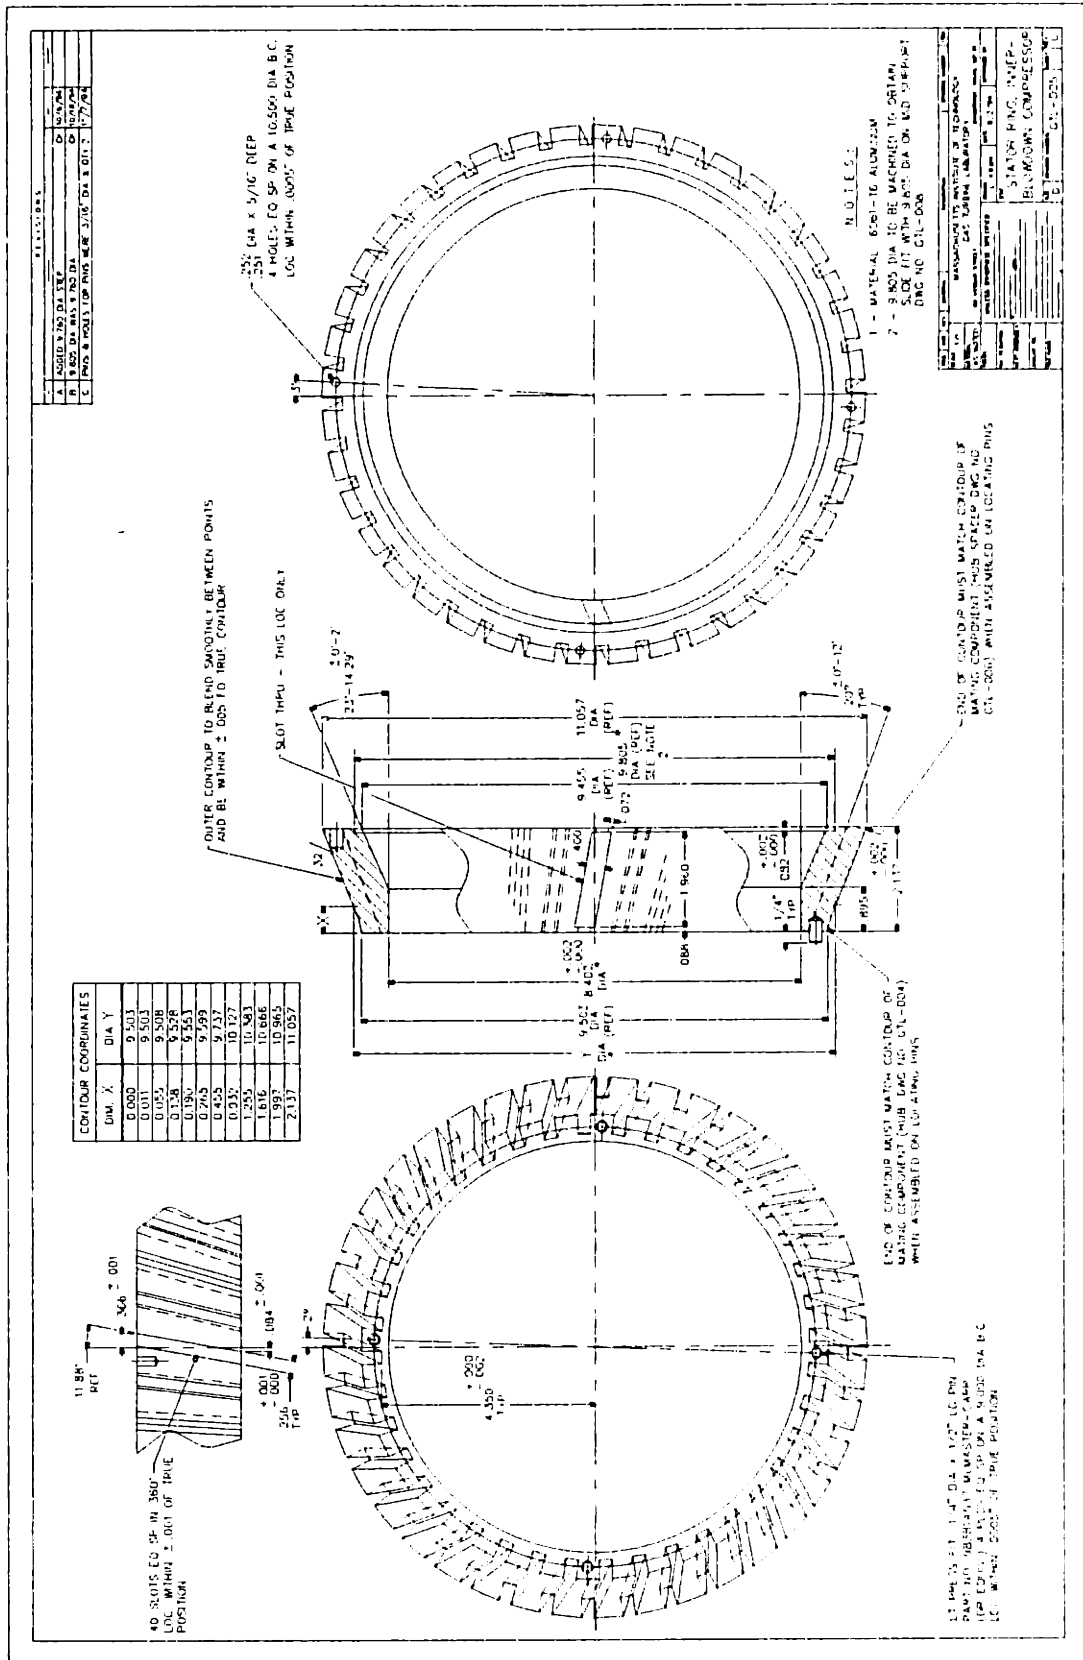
Fan stage drawing (GTL-005): stator hub ring
